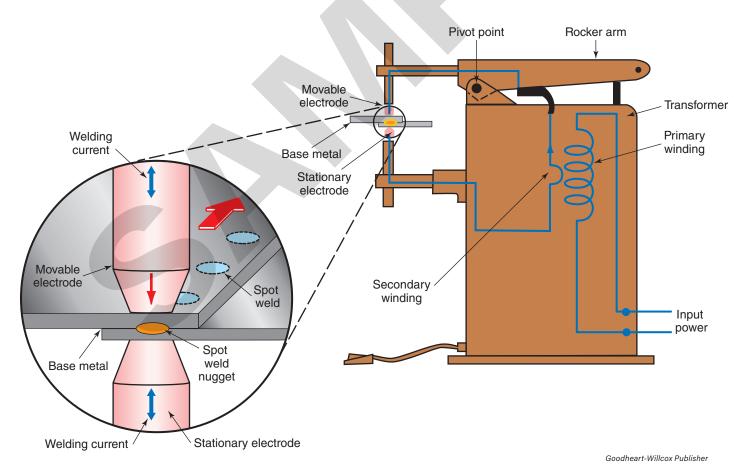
Resistance spot welding (RSW). High electrical current heats a small area on two or more sheets of metal as the sheets are pressed together between the spot-welding electrodes. The metals become hot enough to fuse together.
